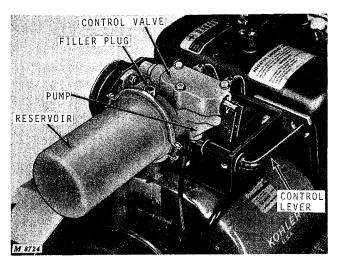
Control Valve, Pump and Reservoir Mounted on Engine (90° Unit)
